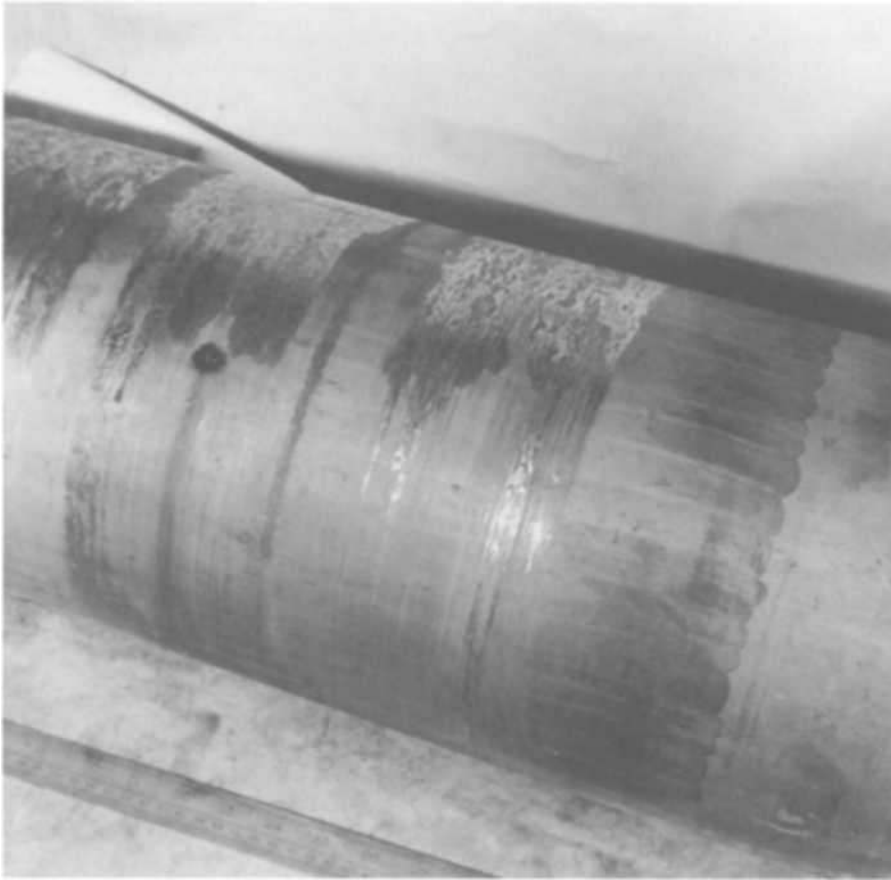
Failure of a crane sheave shaft forging shortly after weld restoration of the bearing surface. The weld beads of the repair can be seen as well as the overlay of bronze from the sheave bearings. Bearing seizure appeared to be through lack of lubrication, and molten bronze had penetrated the shaft surface. Brittle fracture of the shaft started at the bronze penetration areas. The shaft microstructure was coarse apparently through lack of heat treatment leading to low toughness.
